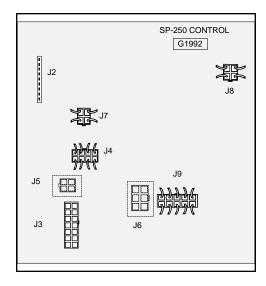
B - Remove Plug J3 to Perform Static SCR Rectifier Assembly Test.
